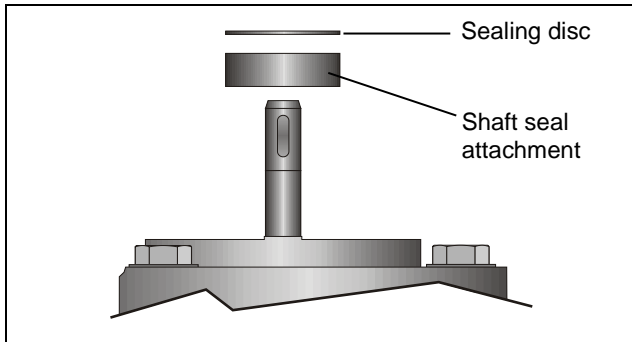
Withdrawing the sealing disc and the shaft seal attachment
